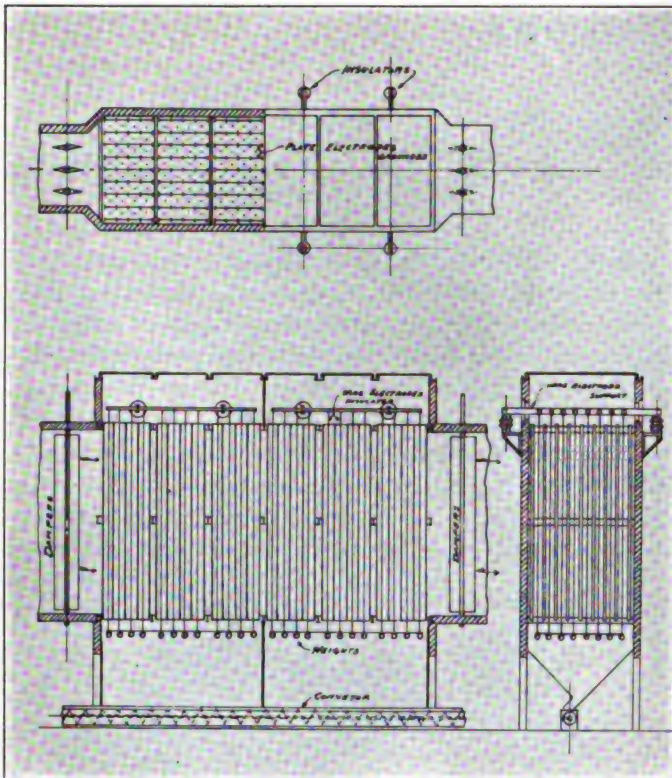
SCHEMATIC DRAWING OF A PLATE TREATER
